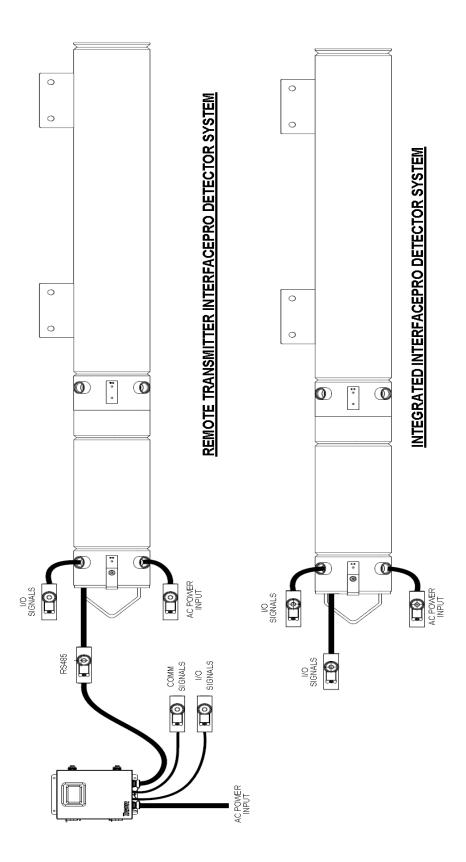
1-0704-051: Drawing, Install Conduit layout, InterfacePRO
